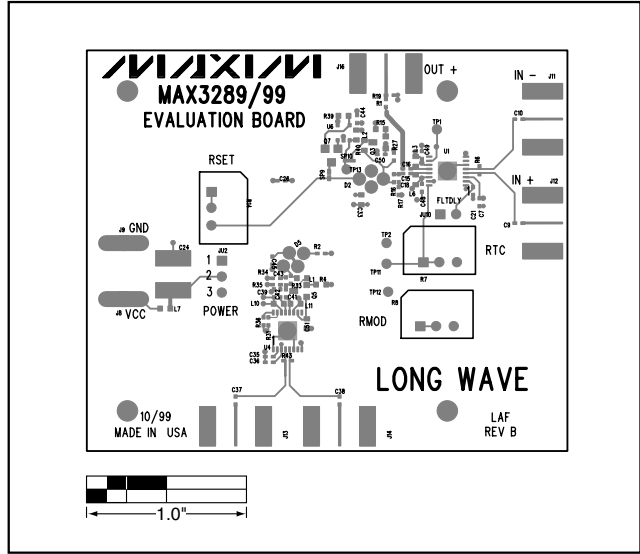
MAX3289 EV Kit Component Placement Guide—Component Side
